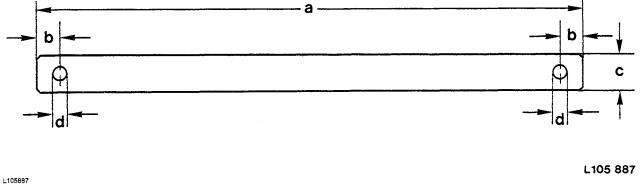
Holding Device (Self-Manufacture), Removal of Final Drive Assemblies
